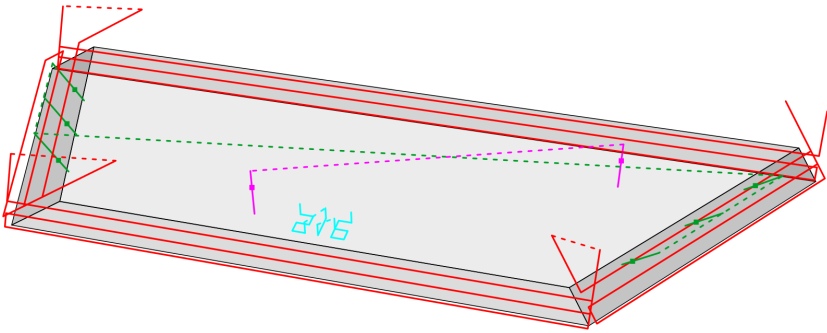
Tool paths for the manufacturing of one chamfered timber panel
